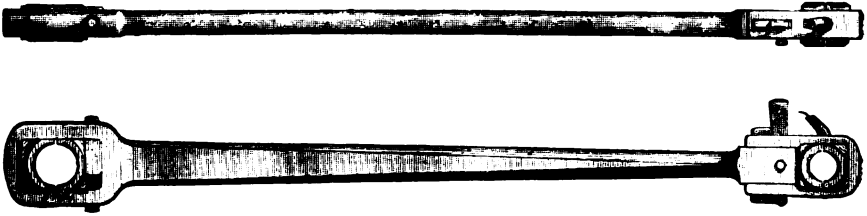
Connecting-rod of the Porter-Allen Engine.
